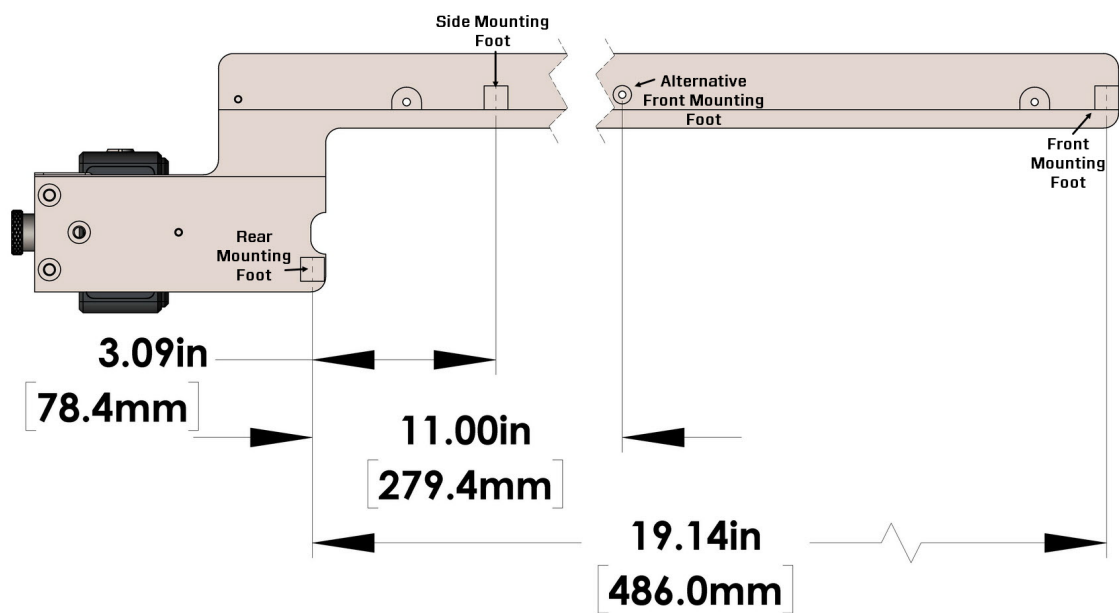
A-703SP-LM Laser Mounting Fixture Dimensions - Bottom
